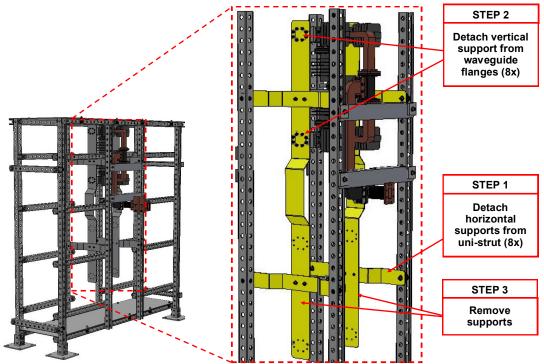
Remove Waveguide Assembly Shipping Supports (C-Band Shown)
